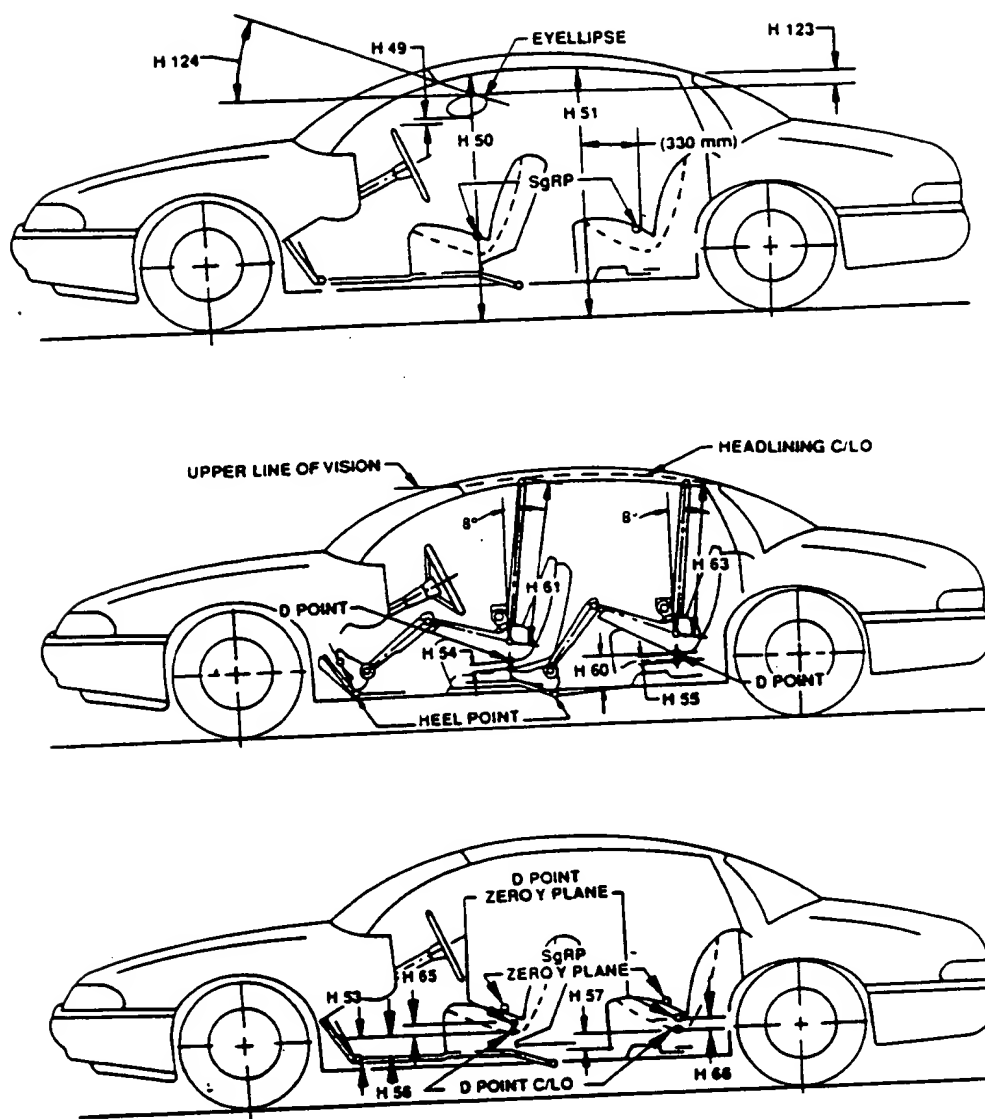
INTERIOR DIMENSIONS, HEIGHT
